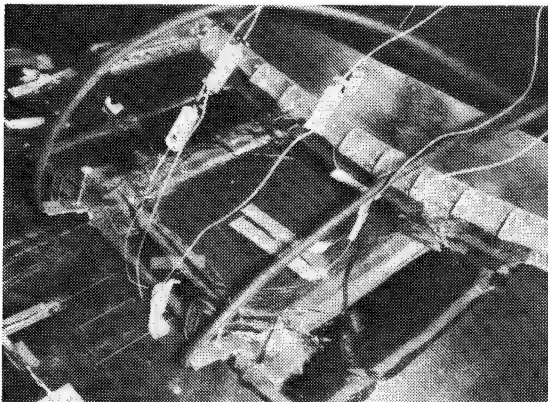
Power Cables and Thermocouple Extensions in Place in Vacuum Bagged Repair Assembly
